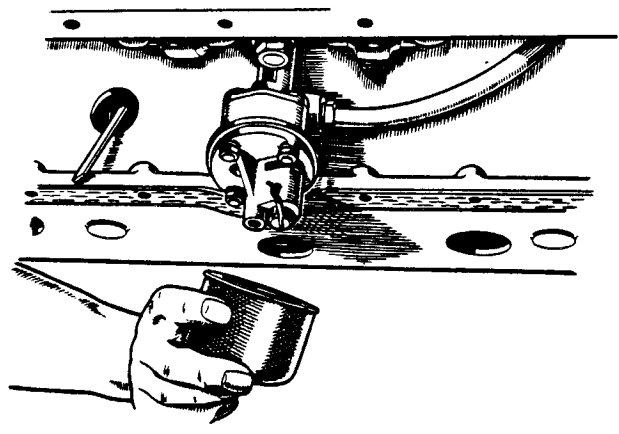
REMOVING THE OIL PUMP GAUZE FILTER
